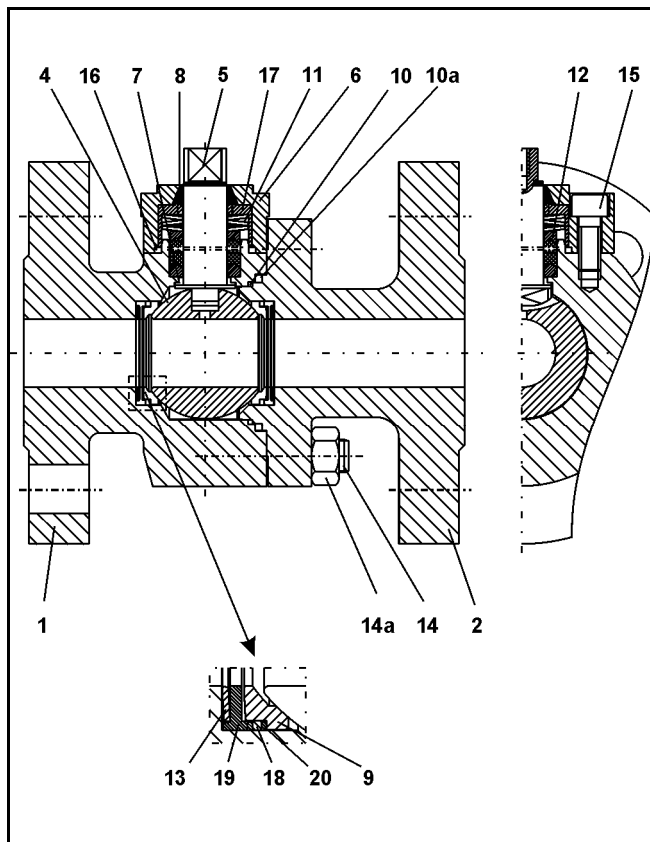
High-temperature Series 26a Ball Valve => Refer to Table 4 (page 7) for parts list
